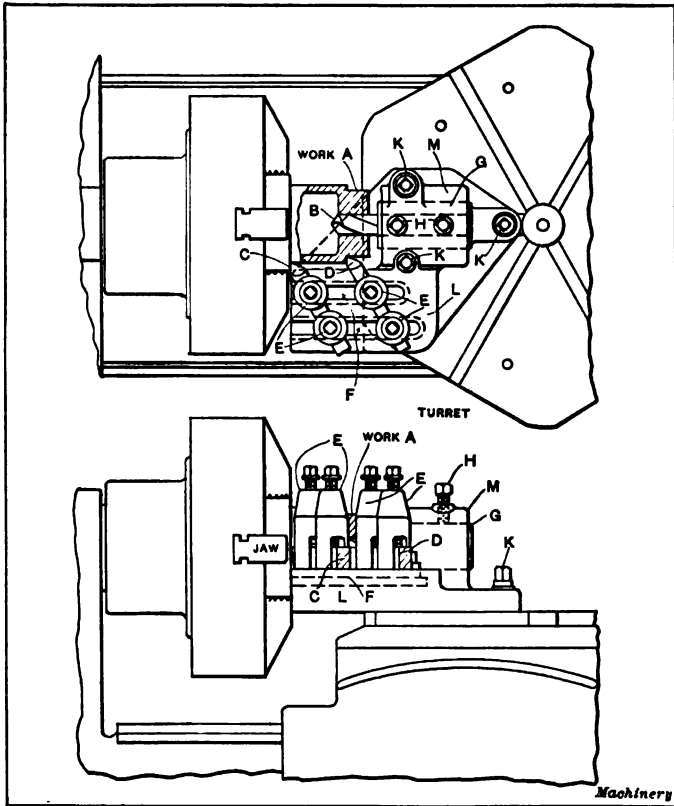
Multiple Tool-holder for the Turntable Type of Lathe
